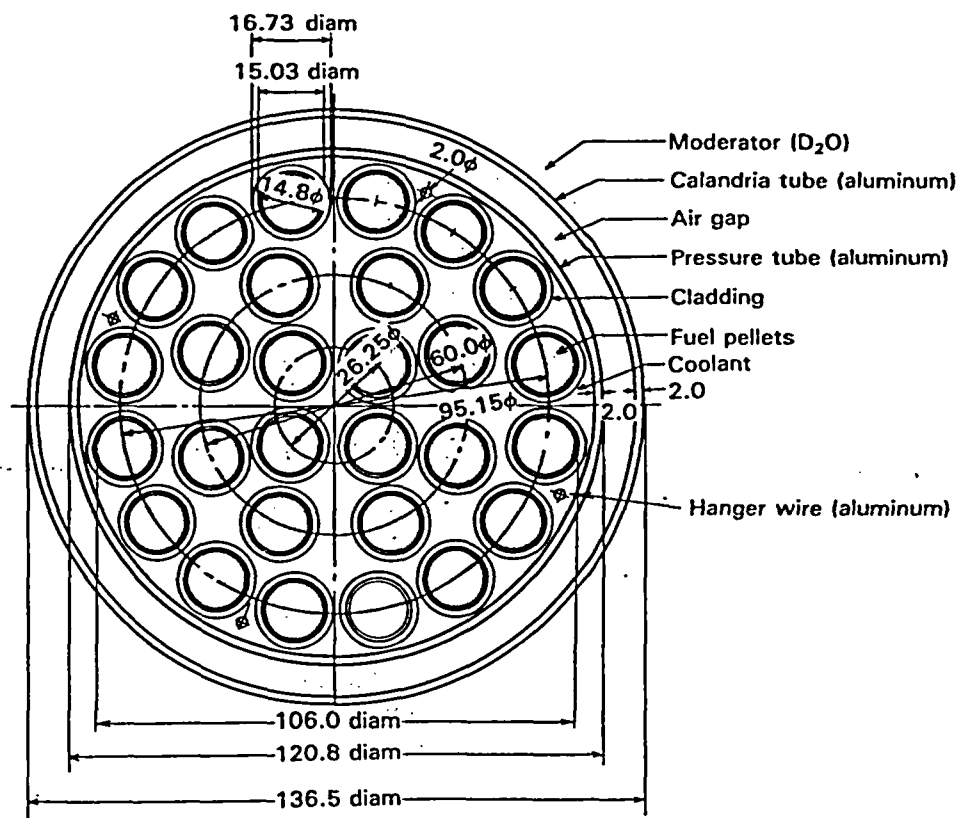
Cross-sectional view of the fuel assembly. Dimensions are given in millimetres.
